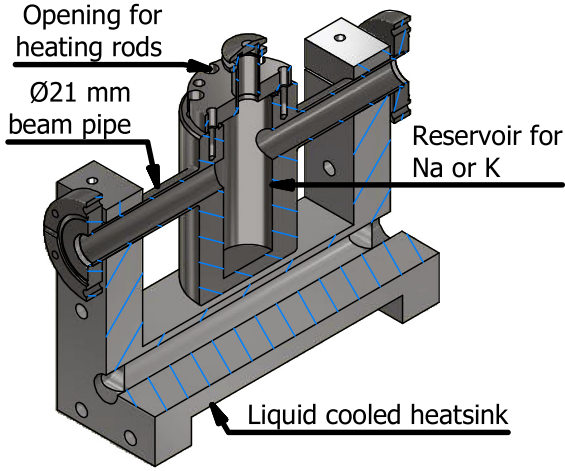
3/4 view of the CAD drawing of the CEC. The stainless steel reservoir has 6 deep holes to house heating rods. The liquid cooled heatsink clamps onto the beam pipe ends.
